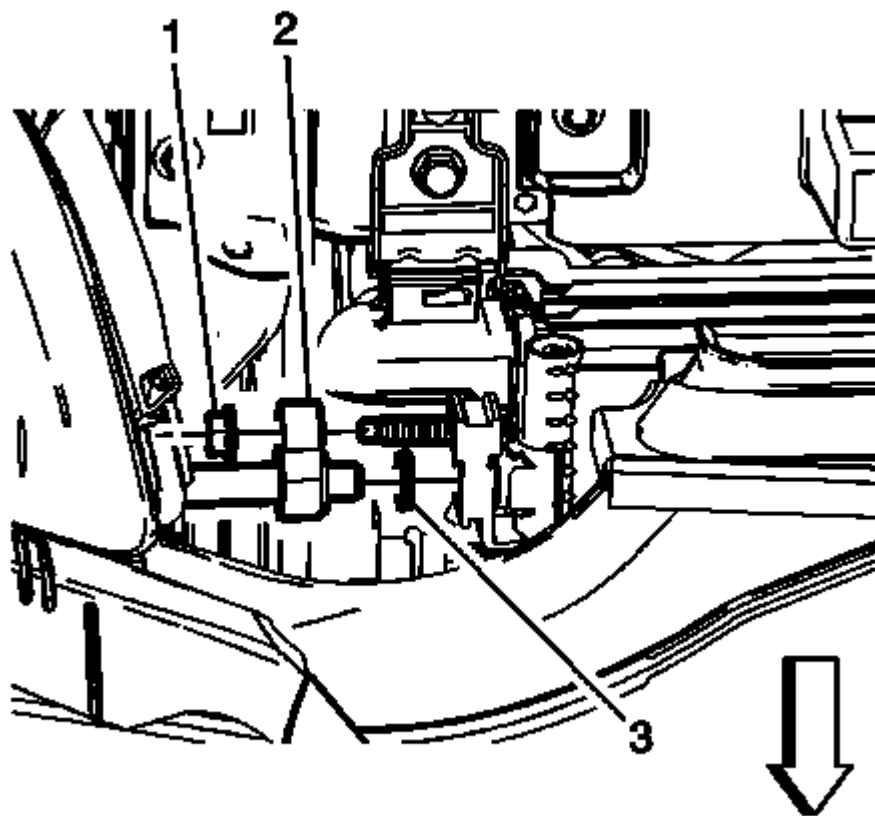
Air Conditioning Compressor Hose Assembly Nut
